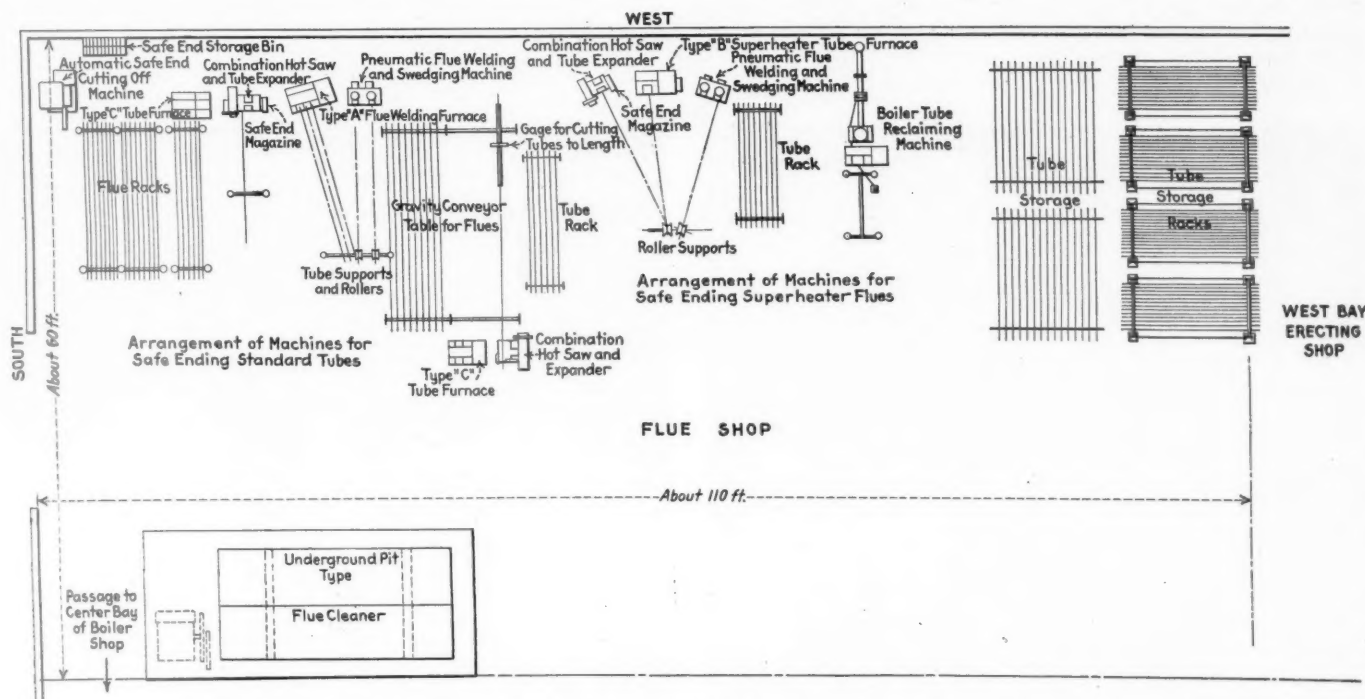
Arrangement of Machinery and Equipment for Safe Ending Locomotive Boiler Tubes and Superheater Flues
